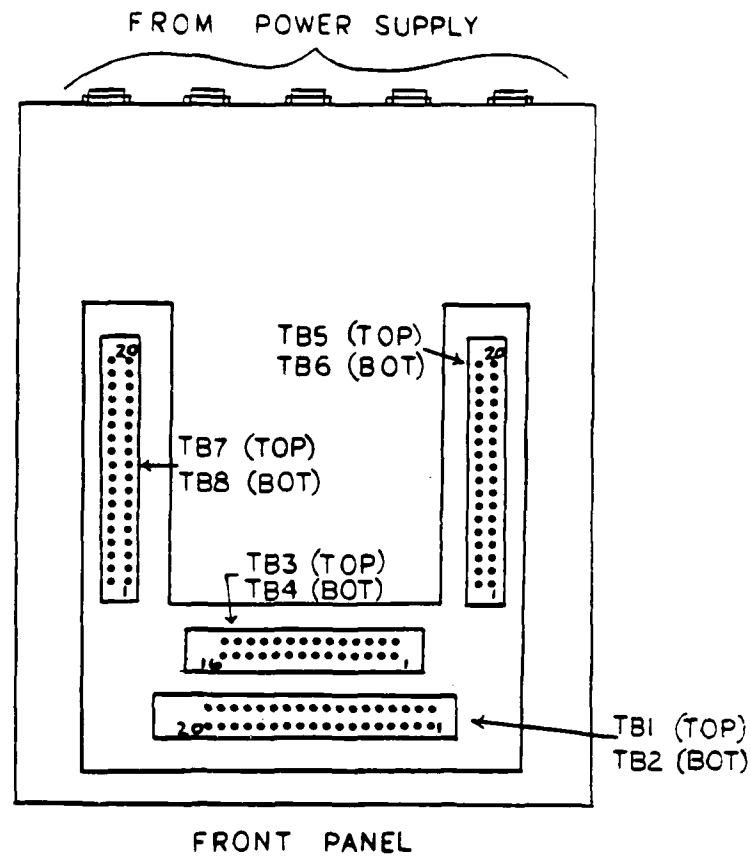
Configuration of RFDA Chassis Terminal Strips
